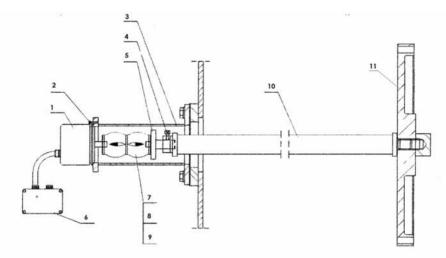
Alpha Lubricator System, angle encoder installation diagram [3]: 1 –angle encoder, 2 – assembling screw, 3 – housing, 4 – securing screw, 5 – connecting piece, 6 – intermediate box, 7 – coupling, 8 – damper plate, 9 – cable ties, 10 – shaft, 11 – free-end of crankshaft (axial vibration damper)
